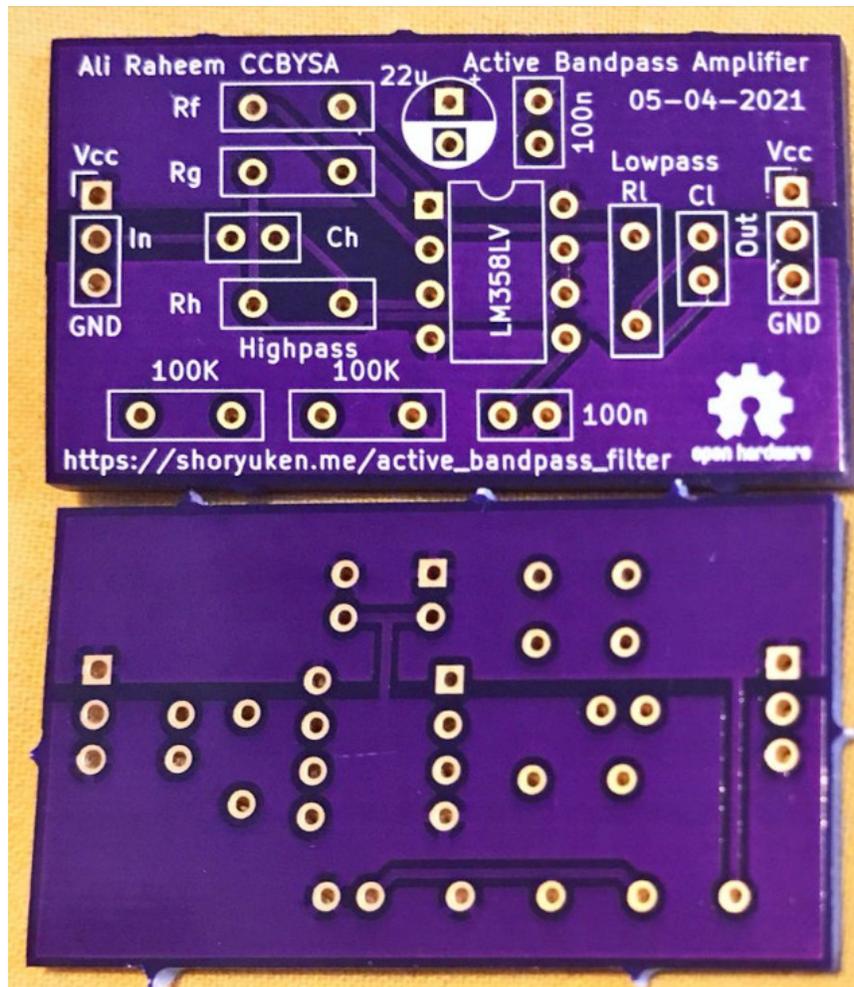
And a small but simple layout PCB for through-hole parts. The boards came with jagged sprue remnants (below) I filed off (above).
